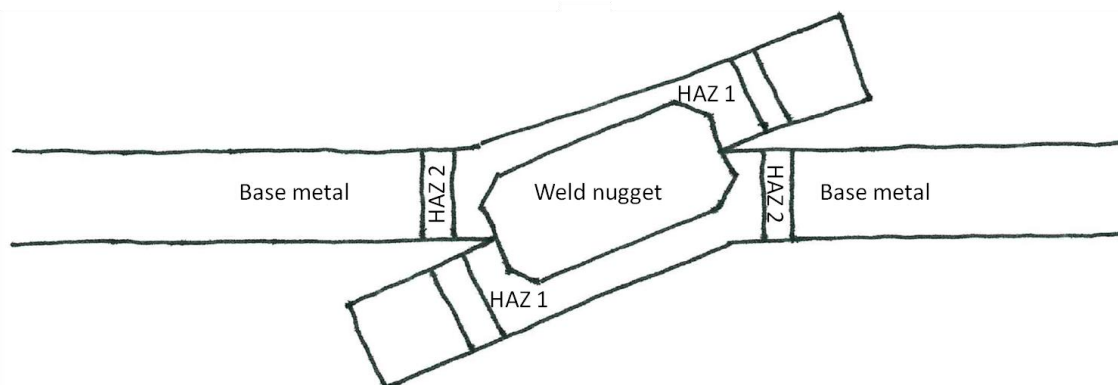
Schematic representation of a test piece with a resistance spot welded joint in material of low carbon content during tensile testing. Indicated are the weld nugget, the region of the heat affected zone that has transformed into austenite during welding, HAZ1, and the region of the heat affected zone that has not transformed into austenite, HAZ2.
